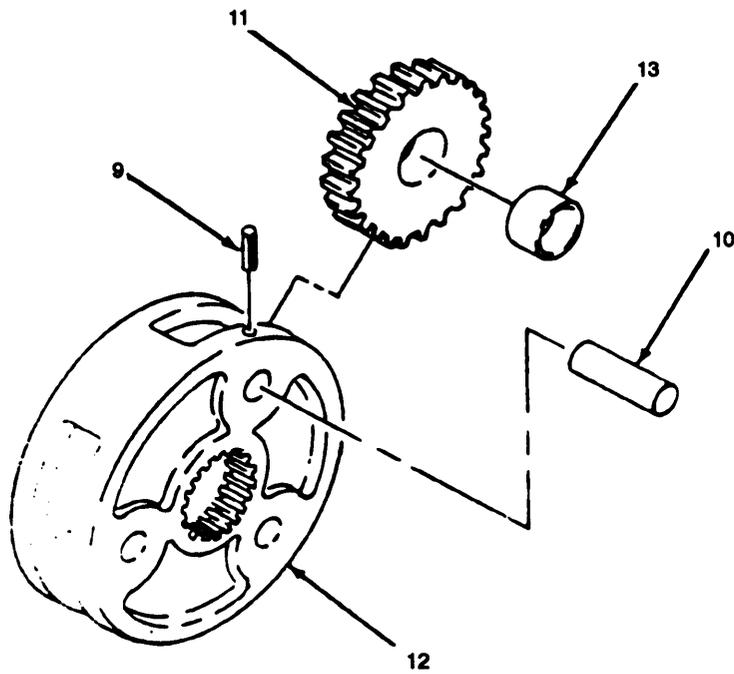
Winch Assembly Model 11-S-EC, Reassembly (Sheet 9 of 10).
